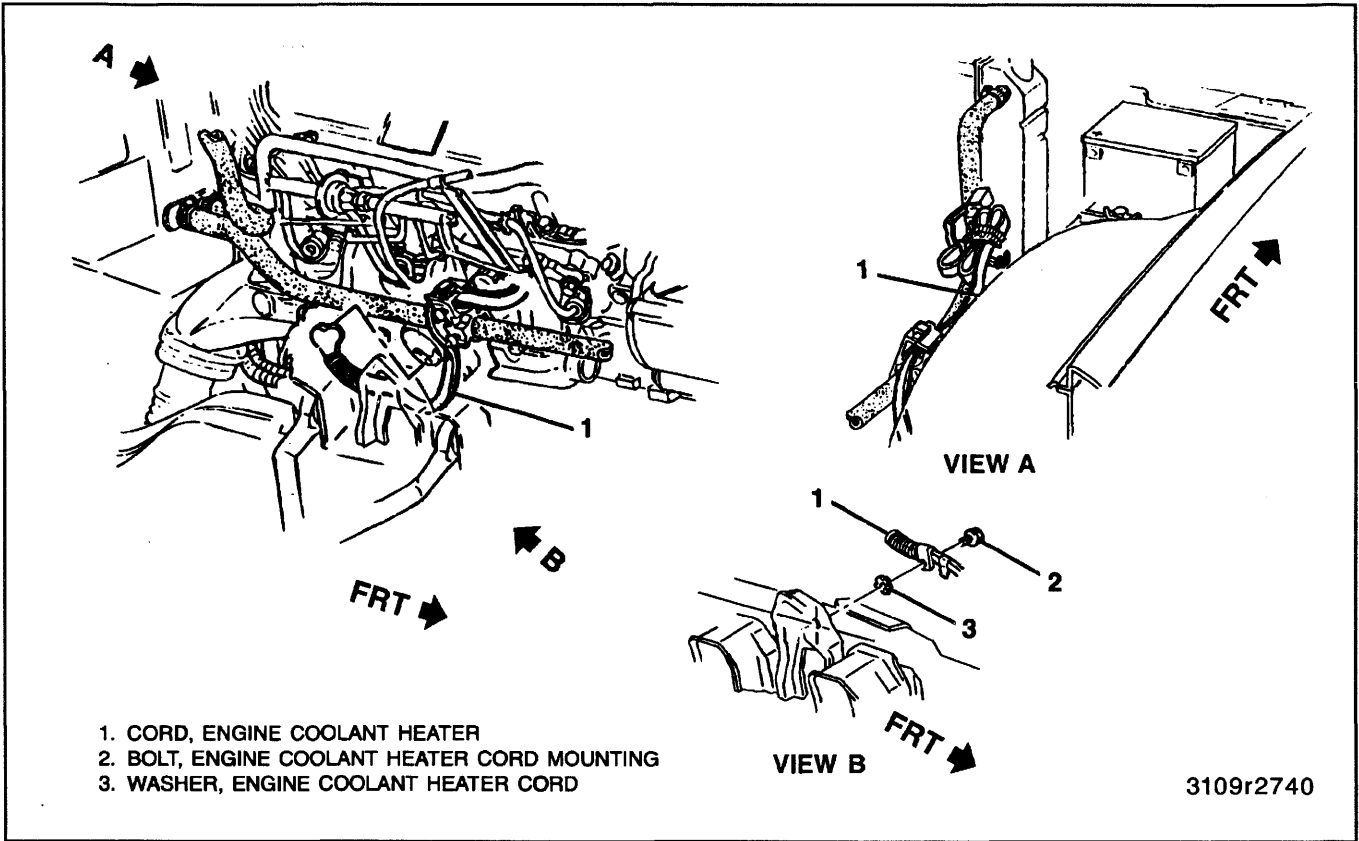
Engine Coolant Heater Cord Routing (Four-Wheel Drive Models with 7.4L Engine)
